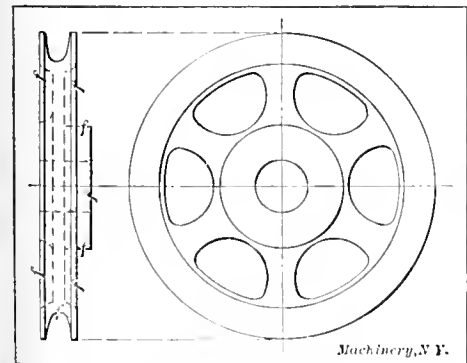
Pulley that is finished by the Tools shown in Figs. 6 and 7
